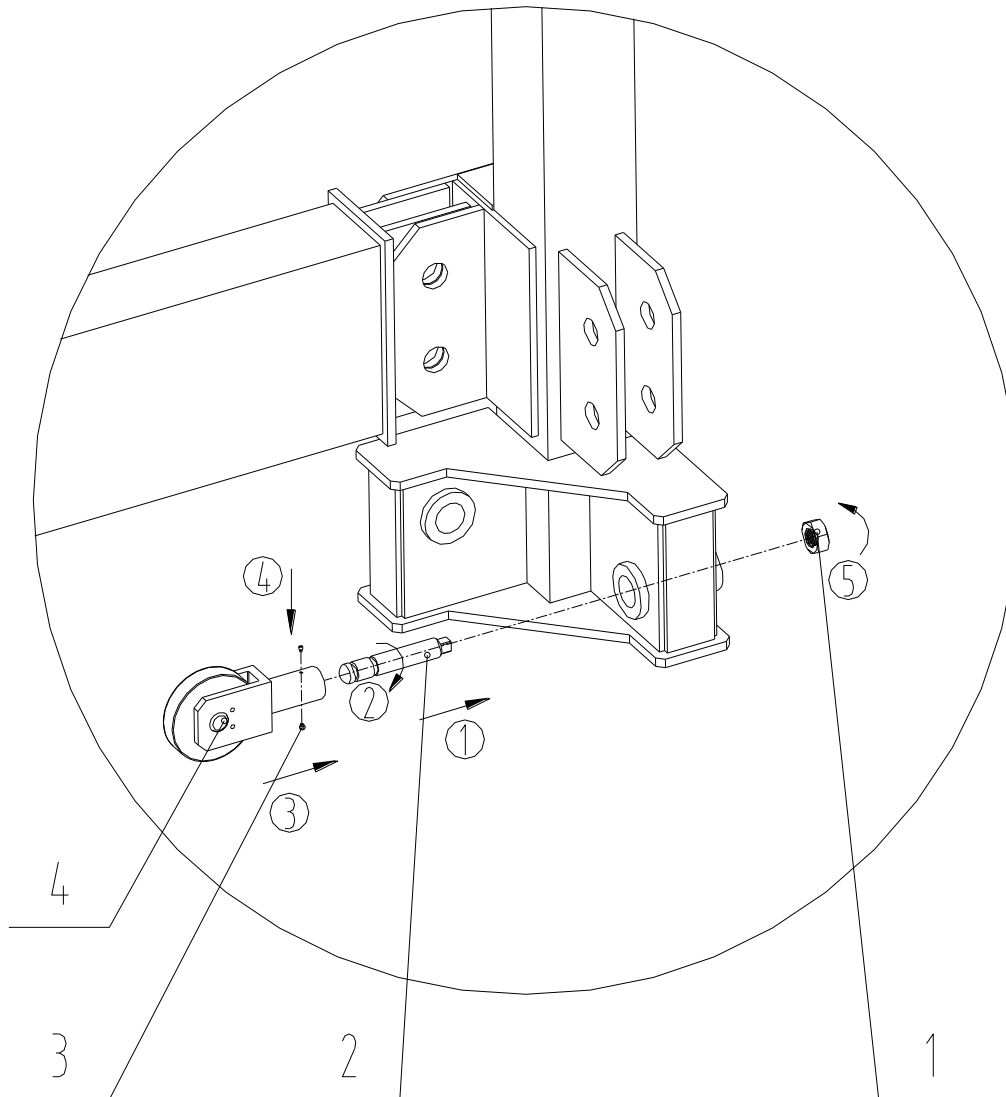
Assembling the idler wheel assemblies to the climbing equipment structure
